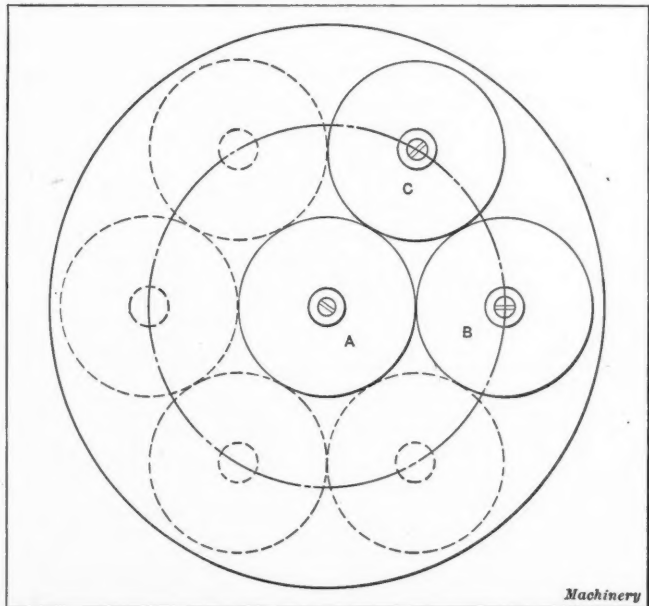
Disk-and-button Method of locating Six equally spaced Holes
